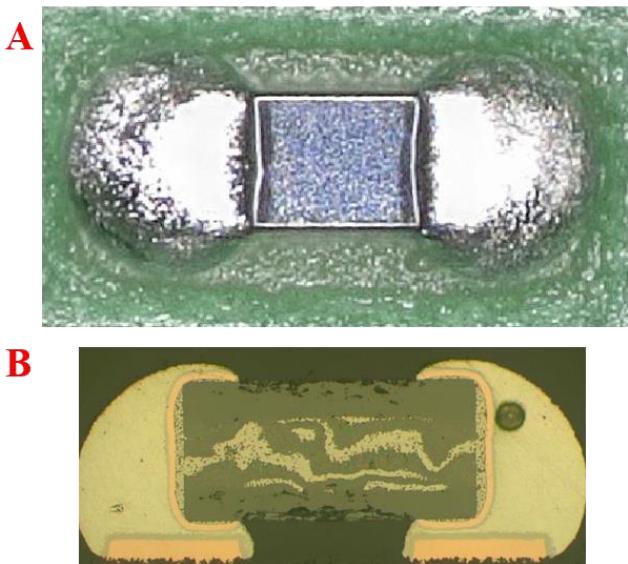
Swollen solder fillets on assembled M0201 component; top view A and cross section perspective B.
